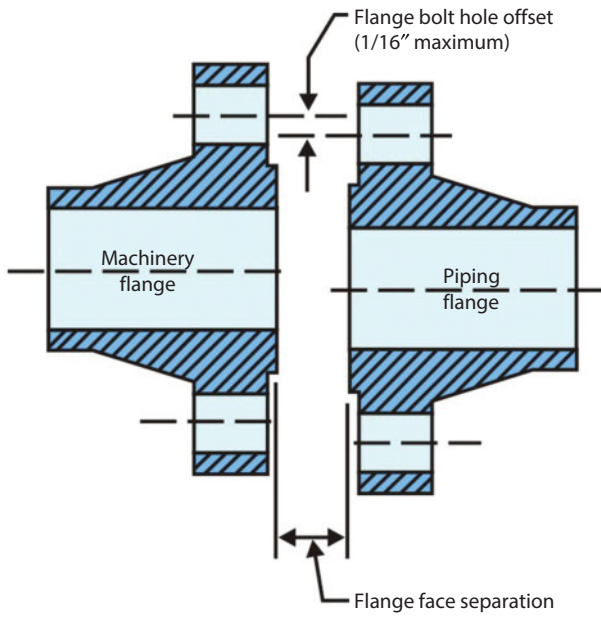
Equipment flange to pipe flange alignment requirements.
